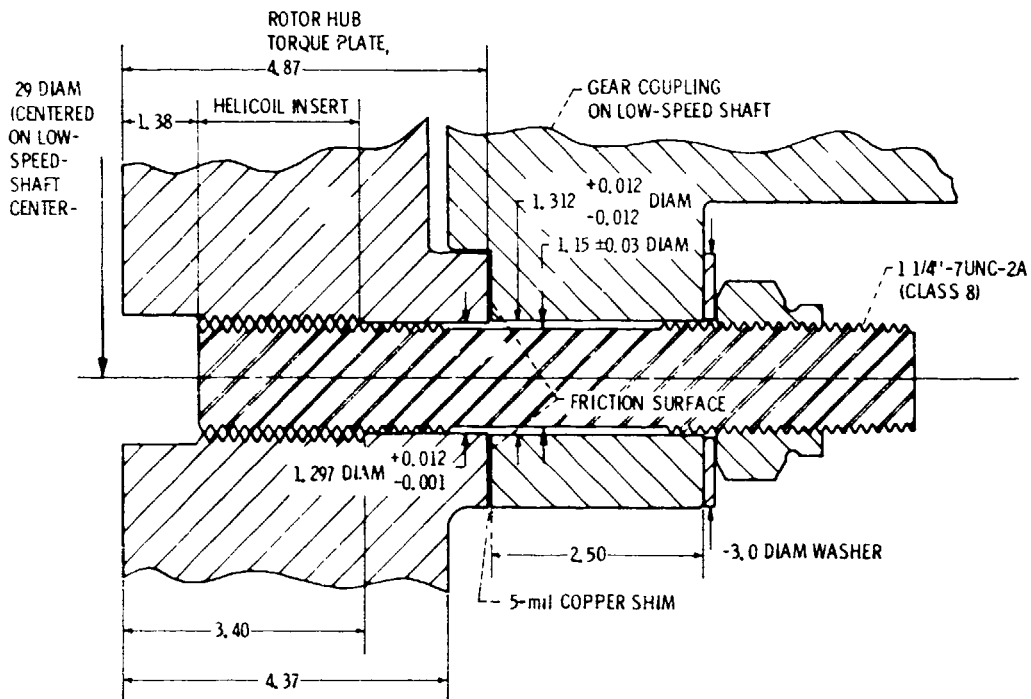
Torque plate/coupling joint (stud detail). Dimensions are in inches.
